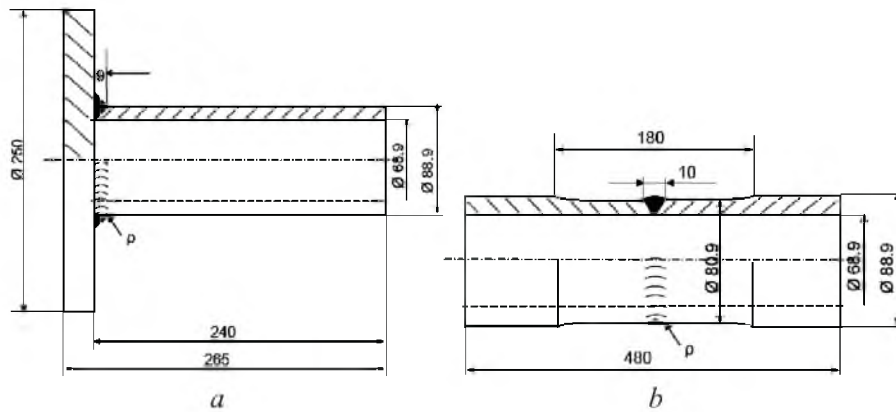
Geometries of welded joints: (a) flange-tube and (b) tube-tube.
